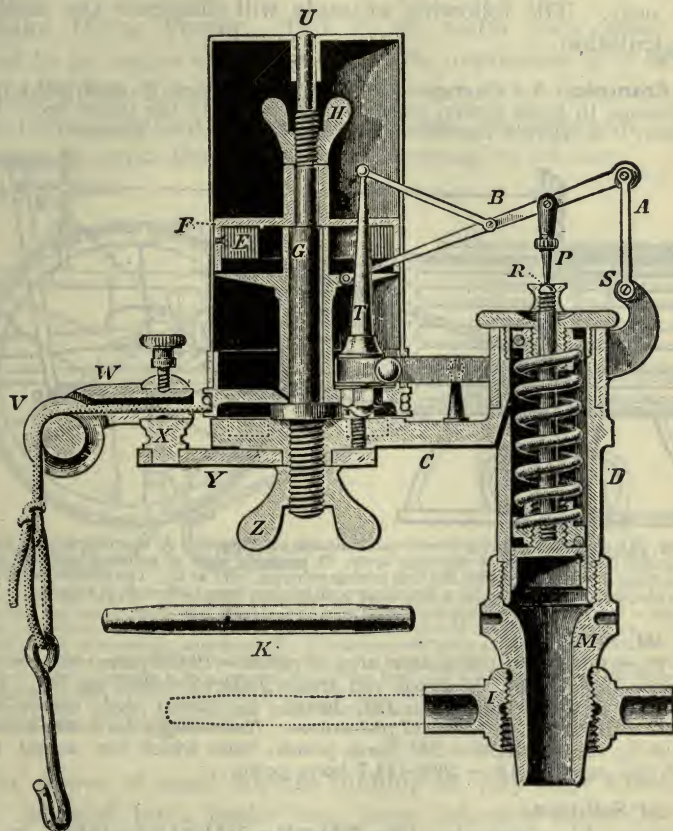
Sectional diagram of the indicator. A, is the swinging bar; B, the pencil bar; C, the indicator frame; D, cylinder containing tension spring; E, coiled spring on drum roller; F, revolving cylinder or drum; G, drum pin; H and Z, thumb screws holding drum; I, nut to connect indicator to pipe; K, lever for screwing up I; M, connection between the spring cylinder and pipe; P, piston rod; R, joint; S, pin; T, post for guide of pencil bar; V, support for cord from reducing lever; W, swivel sleeve for cord; X, swivel pin; Y, support for swivel pin.
